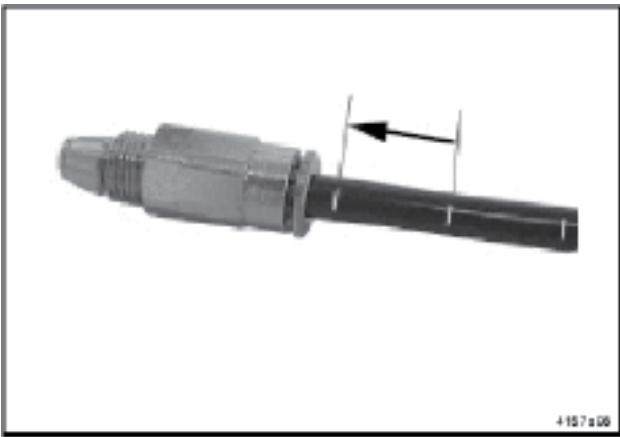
Distributor outlet joint and plastic hose with threaded snap ring
